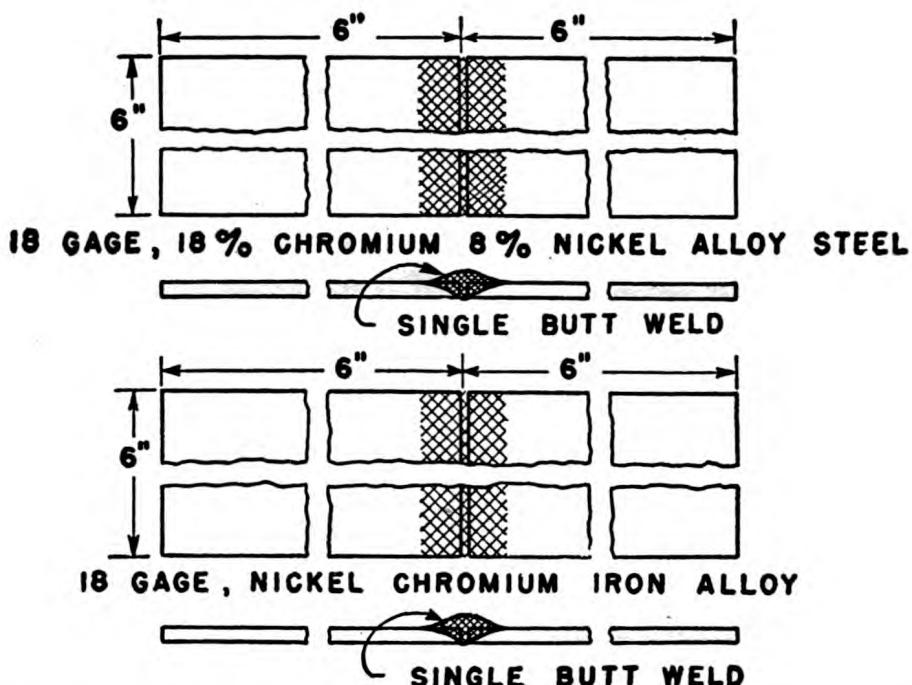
Single, butt weld on corrosion-resisting and heat-resisting steels.
